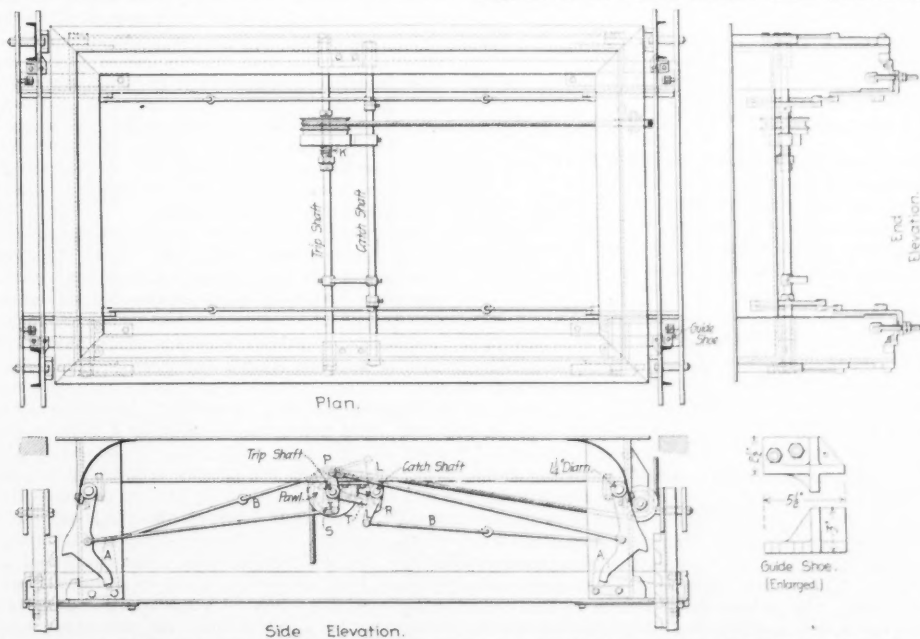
DETAILS OF PLATFORMS AND SAFETY CATCHES OF THE SIDEWALK HOISTS.
